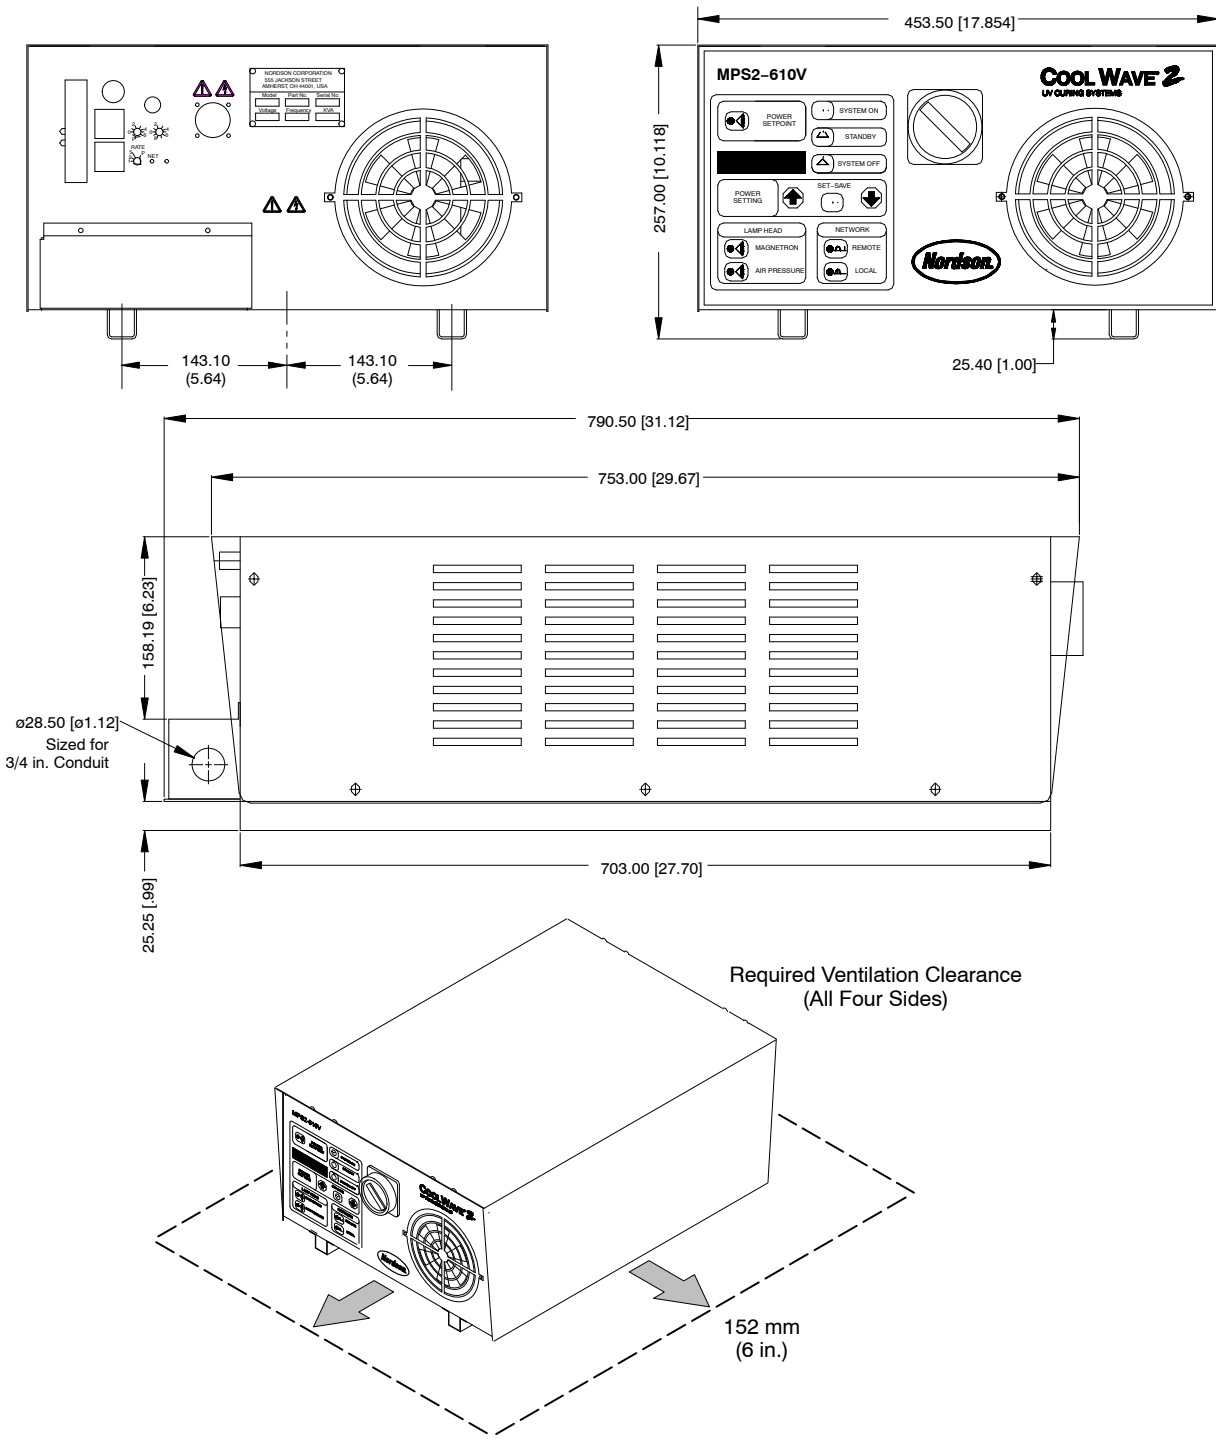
Power Supply Dimensions and Required Ventilation Clearance
